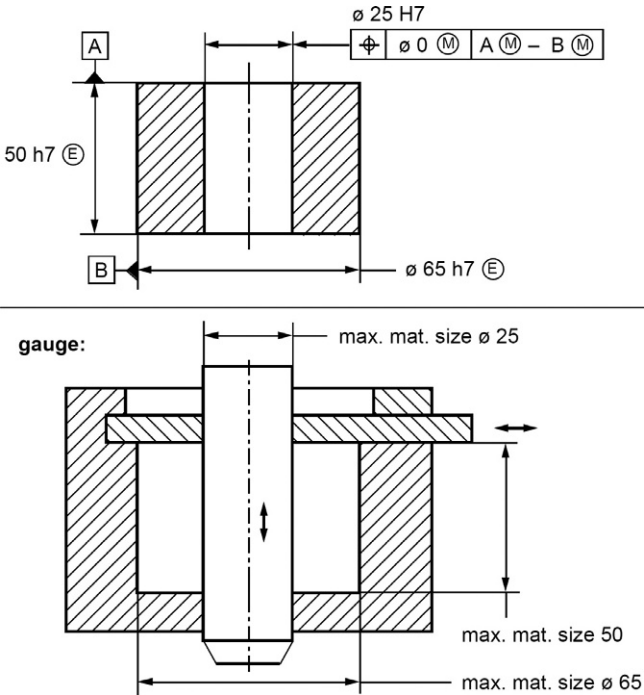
Tolerancing of a bush with everywhere clearance fits
